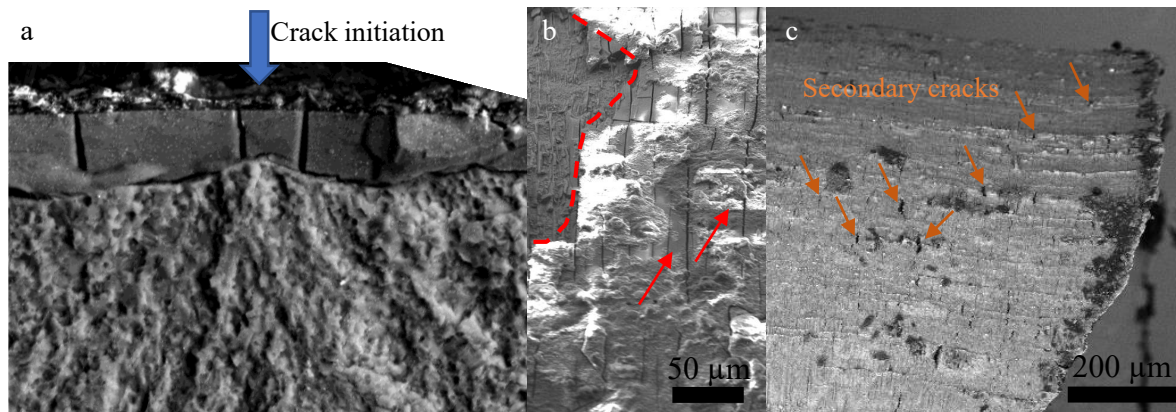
SEM images of 1-day pre-corroded specimens: (a) crack initiation zone marked with blue arrow (in Figure 7.6d), (b) side view after fatigue failure with evidence of corrosion product cracking (highlighted by arrows) and evidence of product exfoliation (area highlighted with dashed line) (in Figure 7.6c), (c) side view close to fatigue fracture with evidence of secondary cracks (highlighted with arrows) (in Figure 7.6c), adapted from [121].
